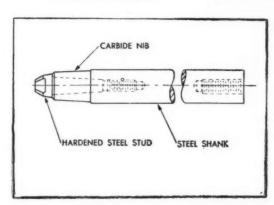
Component parts of a Carboloy mandrel are a carbide nib mounted on a hardened steel stud and drawn up tight to a straight steel shank.
